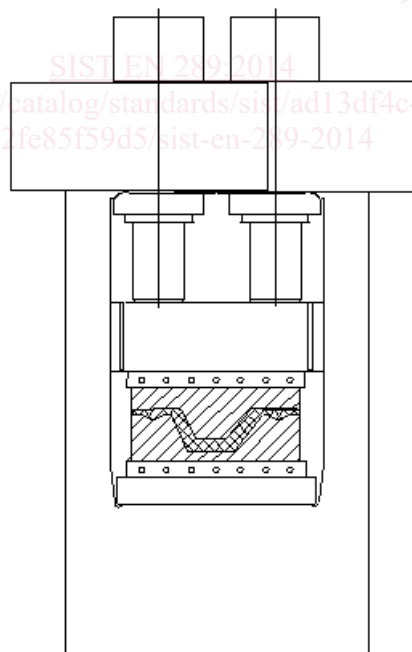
Press for compression moulding shown with mould closed and moulding material formed into shape
